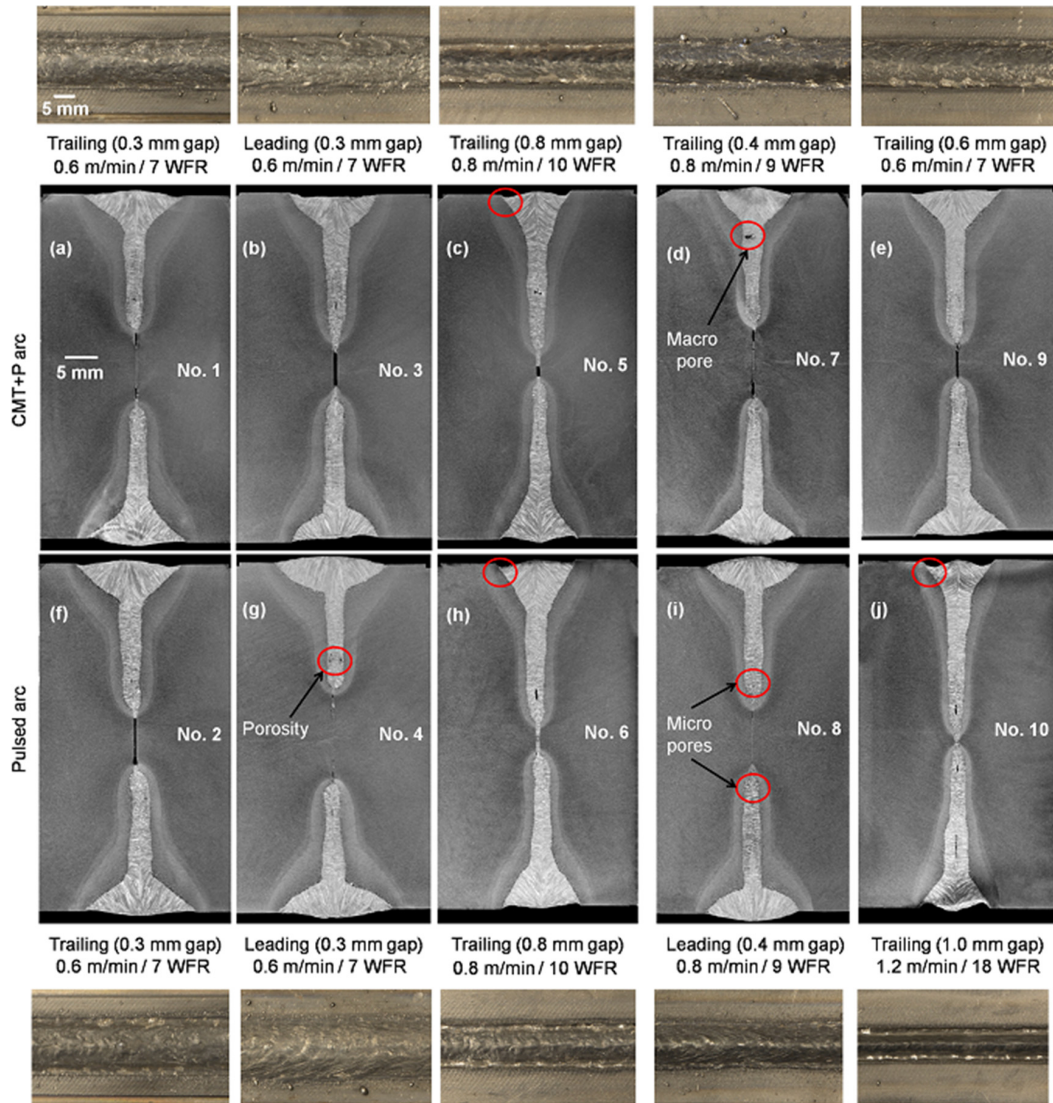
Macrosections and weld seam appearances of the deposited welds.
